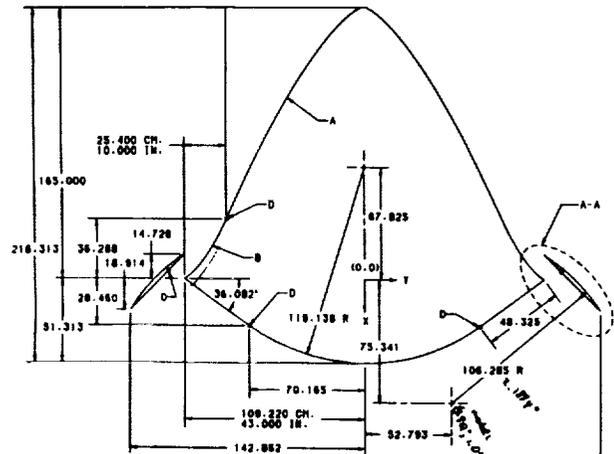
Engineering Drawing of Mercury Lightcraft with Dimensions.
